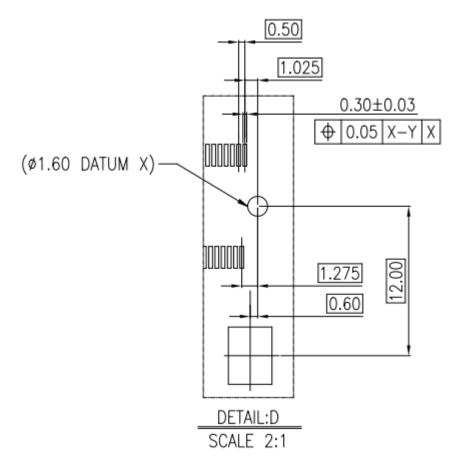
Detail D, recommended pad dimensions for 2309409 (as shown on manufacturer datasheet)
